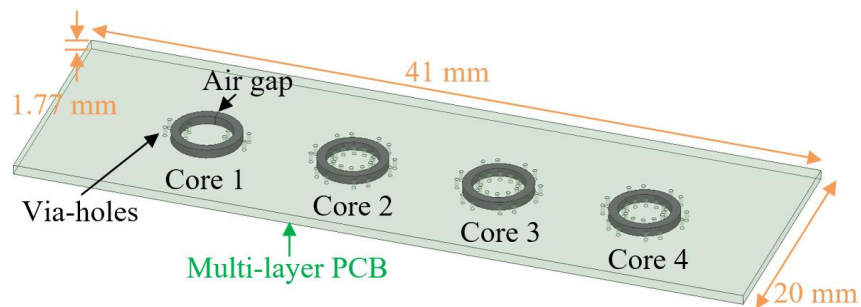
6. 3D model of the PCB-embedded magnetic board.
